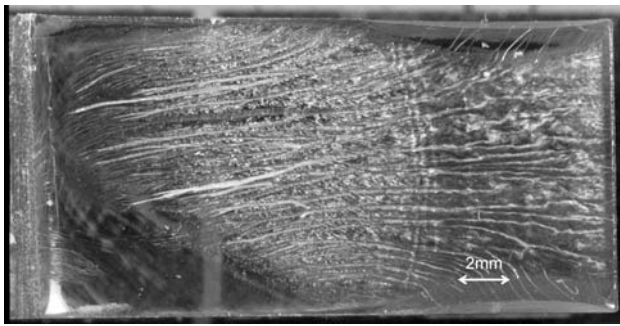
The fracture surface of a PMMA specimen tested with 30% overloads every 100 cycles. A change in the appearance of the fracture surface from smooth to fibrous is visible, starting in the middle of the specimen- this is the change in crack path described by Pulos. Shear lips are visible indicating pronounced tunnelling of the crack at high ΔK . This did not occur in all specimens
